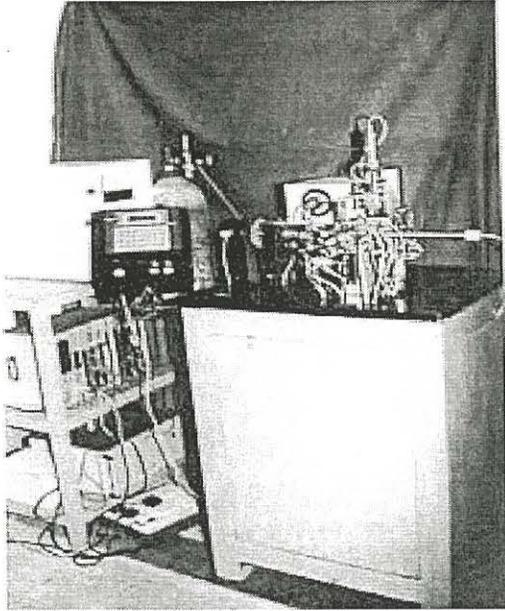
INDIGENOUS EQUIPMENT DEVELOPED FOR RESISTANCE WELDING OF Zr-4 SPACER PADS ON Zr-4 FUEL CLADDING
